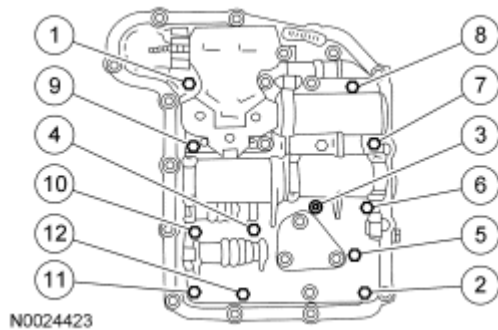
Main Control Valve Body Mounting Bolt Tightening Sequence
